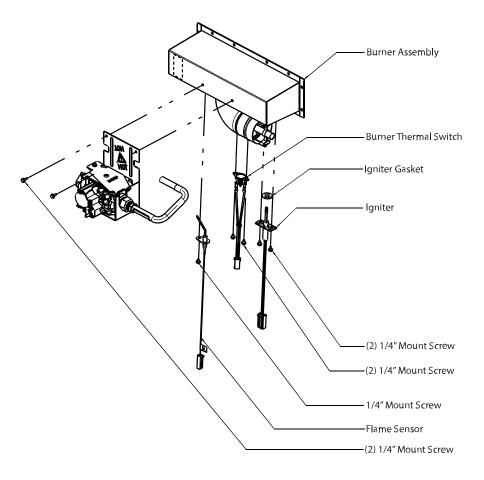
Non-Condensing Ultra Low NOx Furnace Burner Assembly
